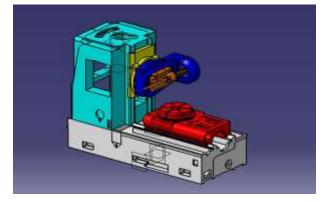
Assembly of 6-Axis CNC Gear Hobbing Machine
